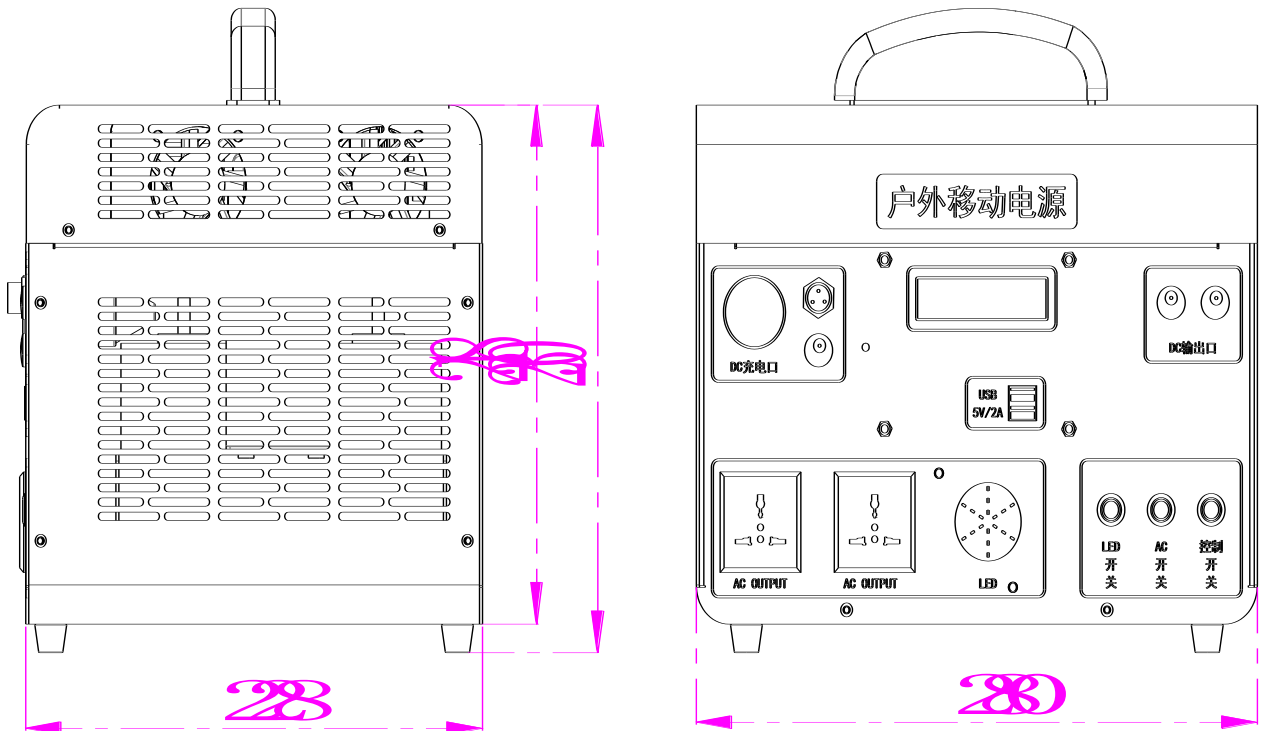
Installation dimensions of SG-BX300W / 500W / 1000W-100AH Lithium Battery Integrated Machine
